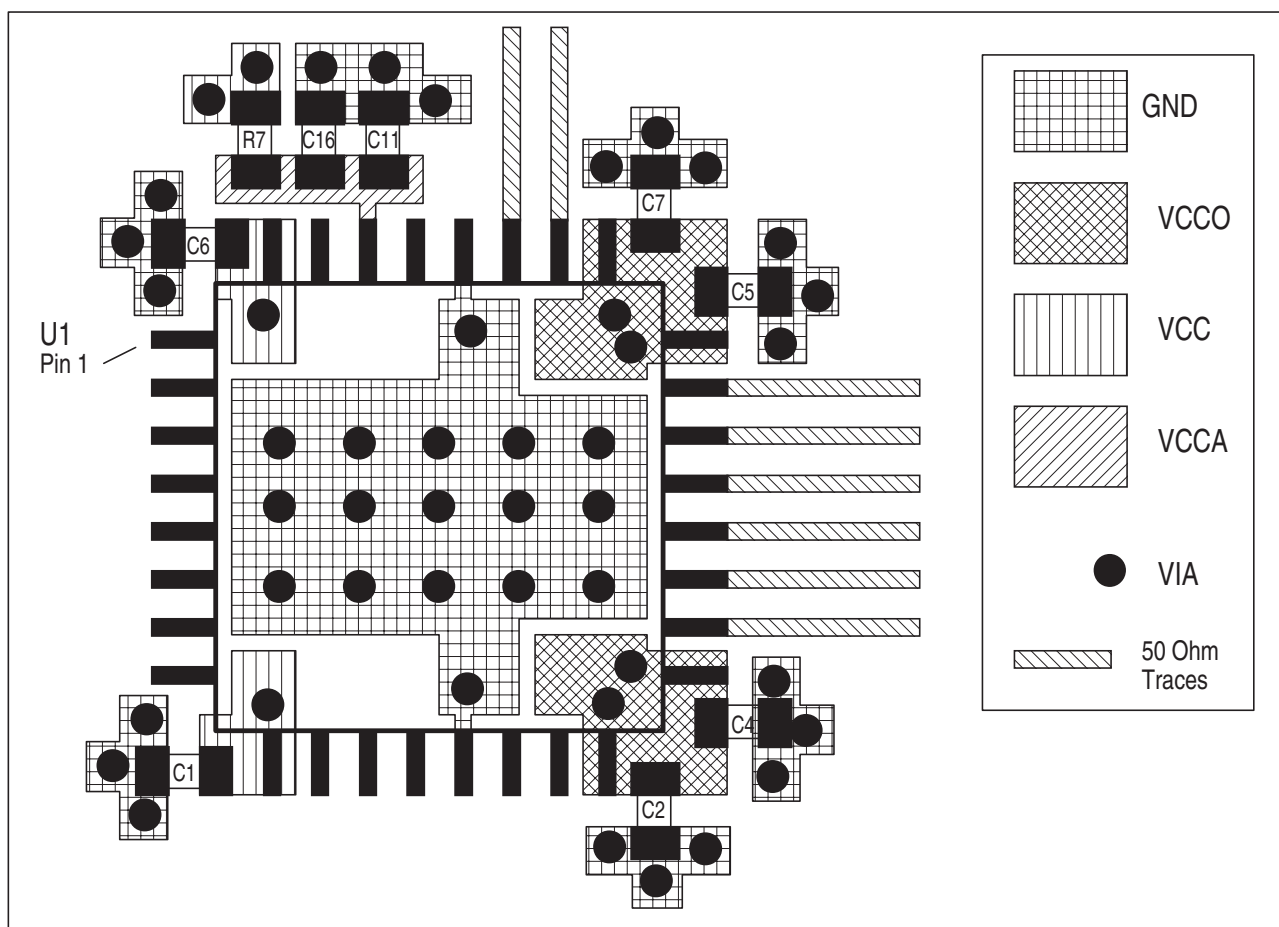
PCB BOARD LAYOUT FOR ICS8735-31
